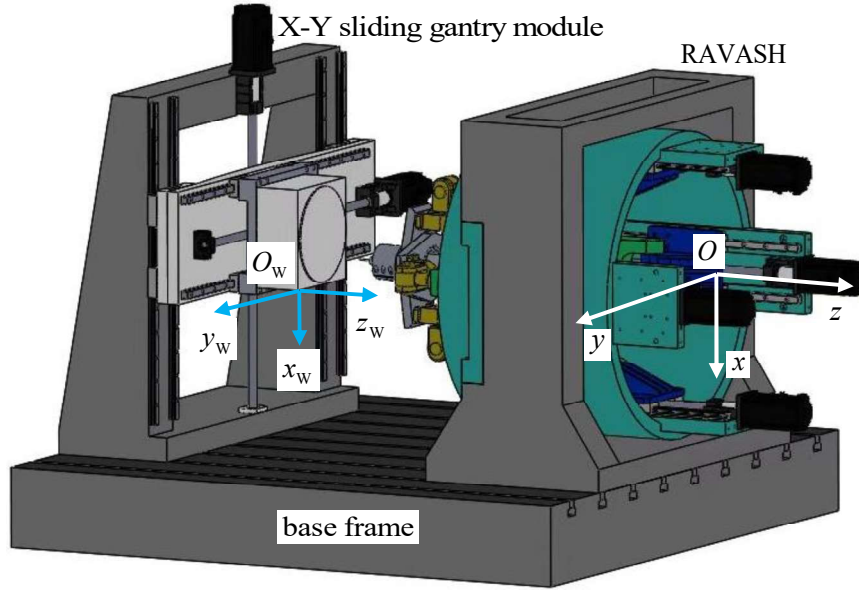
A virtual prototype of the proposed 5-axis machine tool
